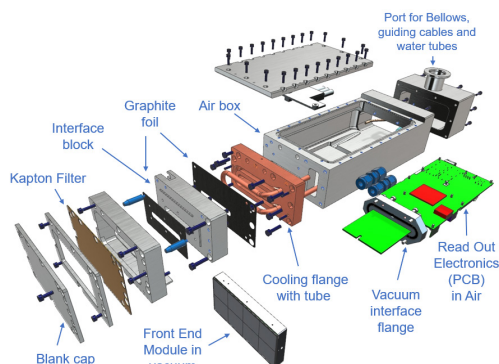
Explosion drawing of the air box housing for a single Jungfrau module detector. The key components are labelled.
